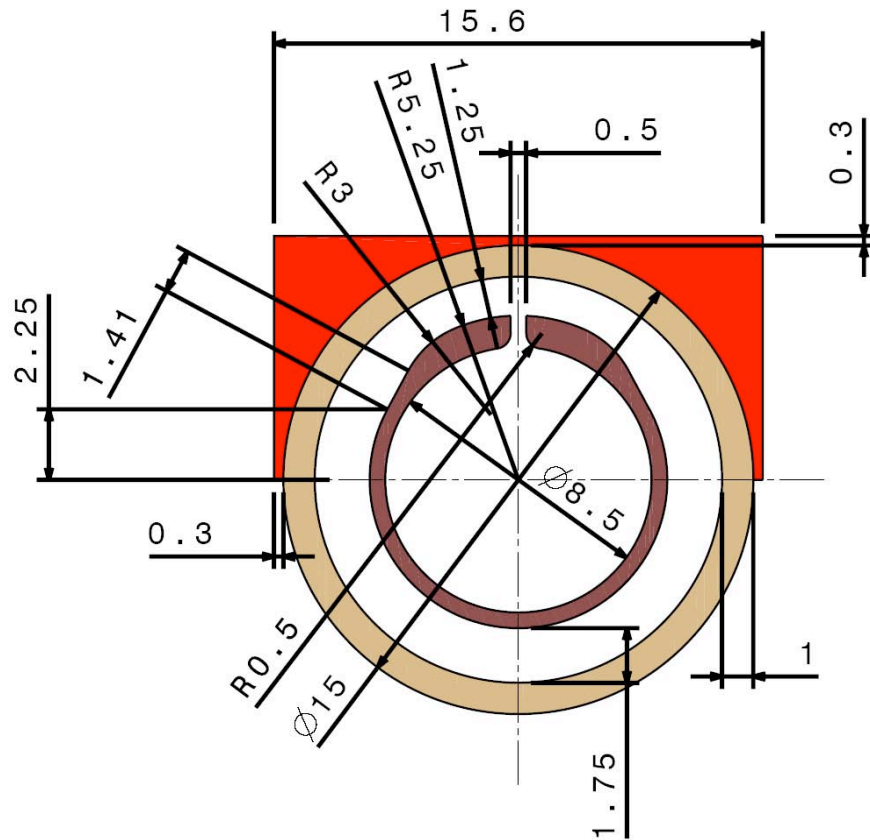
Dimensions at cross section of the T-tube heat exchange part
